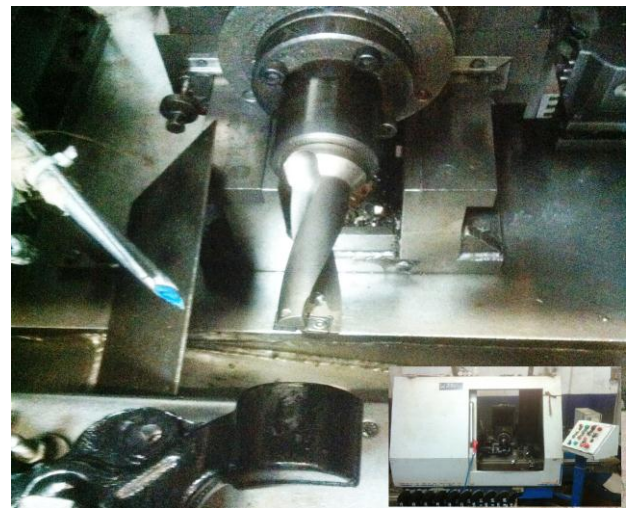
'U' Drill Mounting on SPM with the work piece, in right side Bottom inset view of Actual view of SPM Machine.
